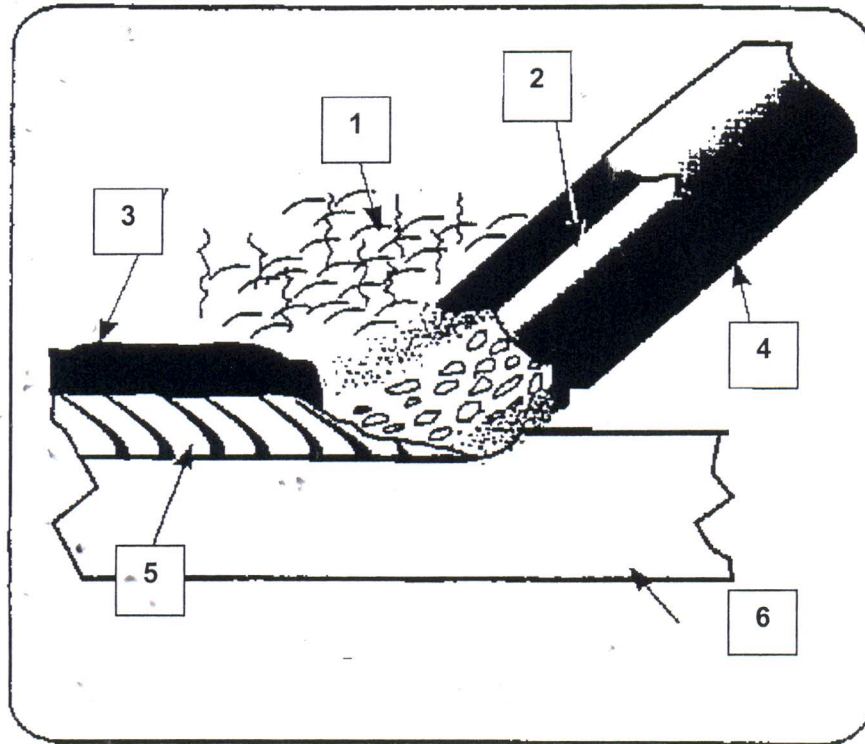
Manual Metal Arc Welding (MMAW)
